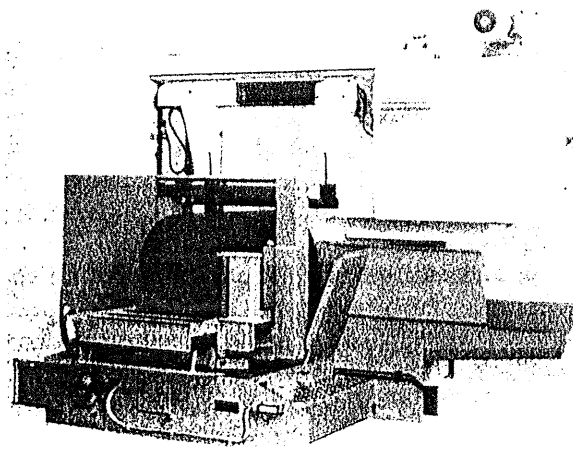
Horizontal band sawing machine. (Courtesy Kasto-Racine, Inc.)
